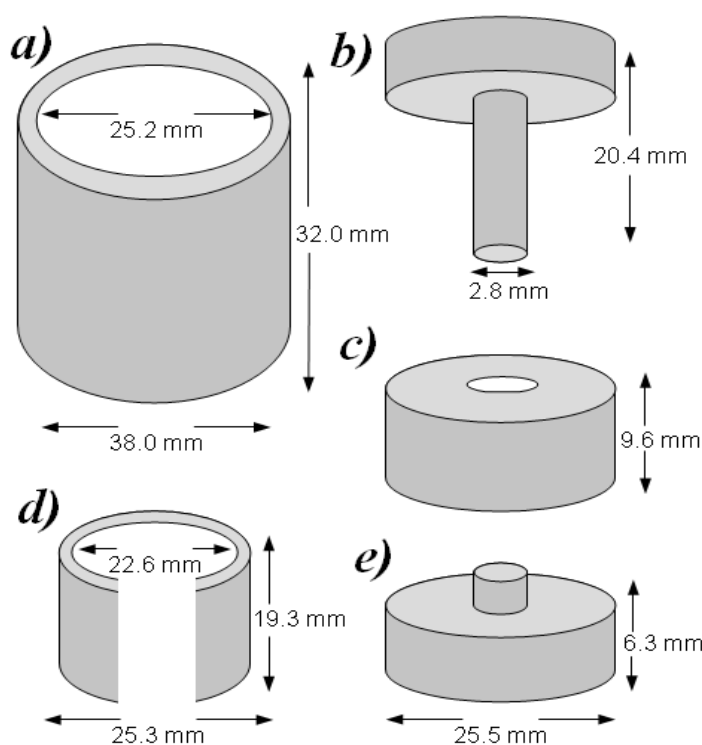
Pellet die components. a) Sheath: protects and aligns other parts; b) piston: applies force through the holder; c) Holder: contains sample; d) Spacer: helps to remove pellet; e) Stand: base of die.
